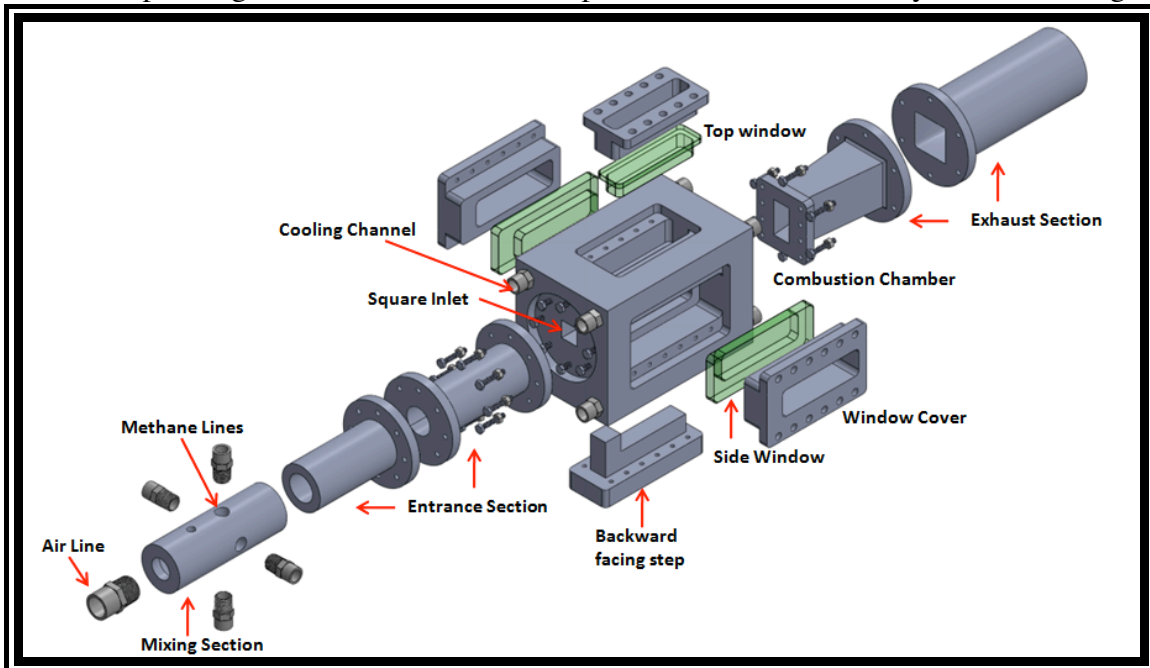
Exploded CAD model of combustor assembly (flow direction: left – right)
